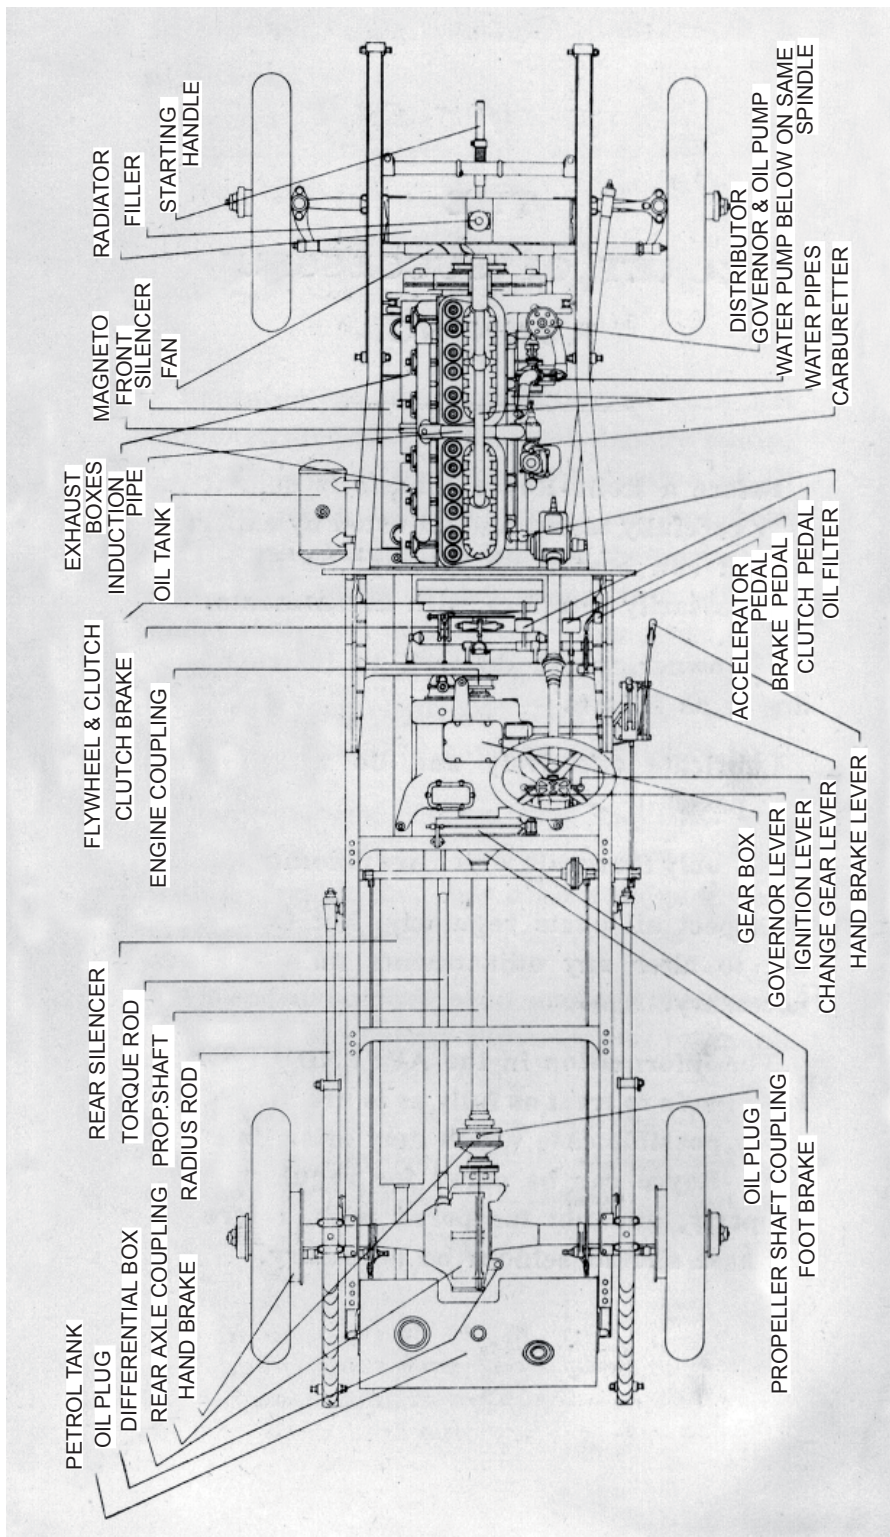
Plan of 40-50 h.p. 6-cyl. Rolls-Royce Chassis
